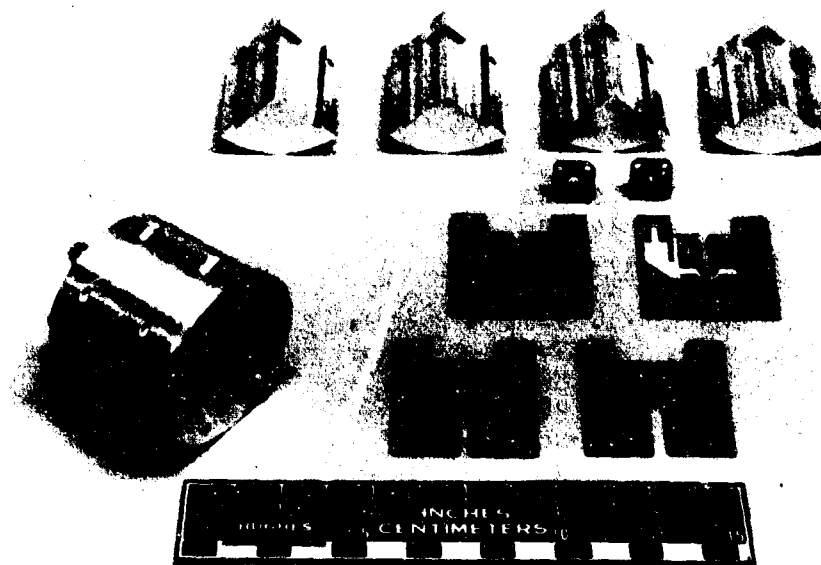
Components and assembled crossed-slot radiating element (4R-53938).
